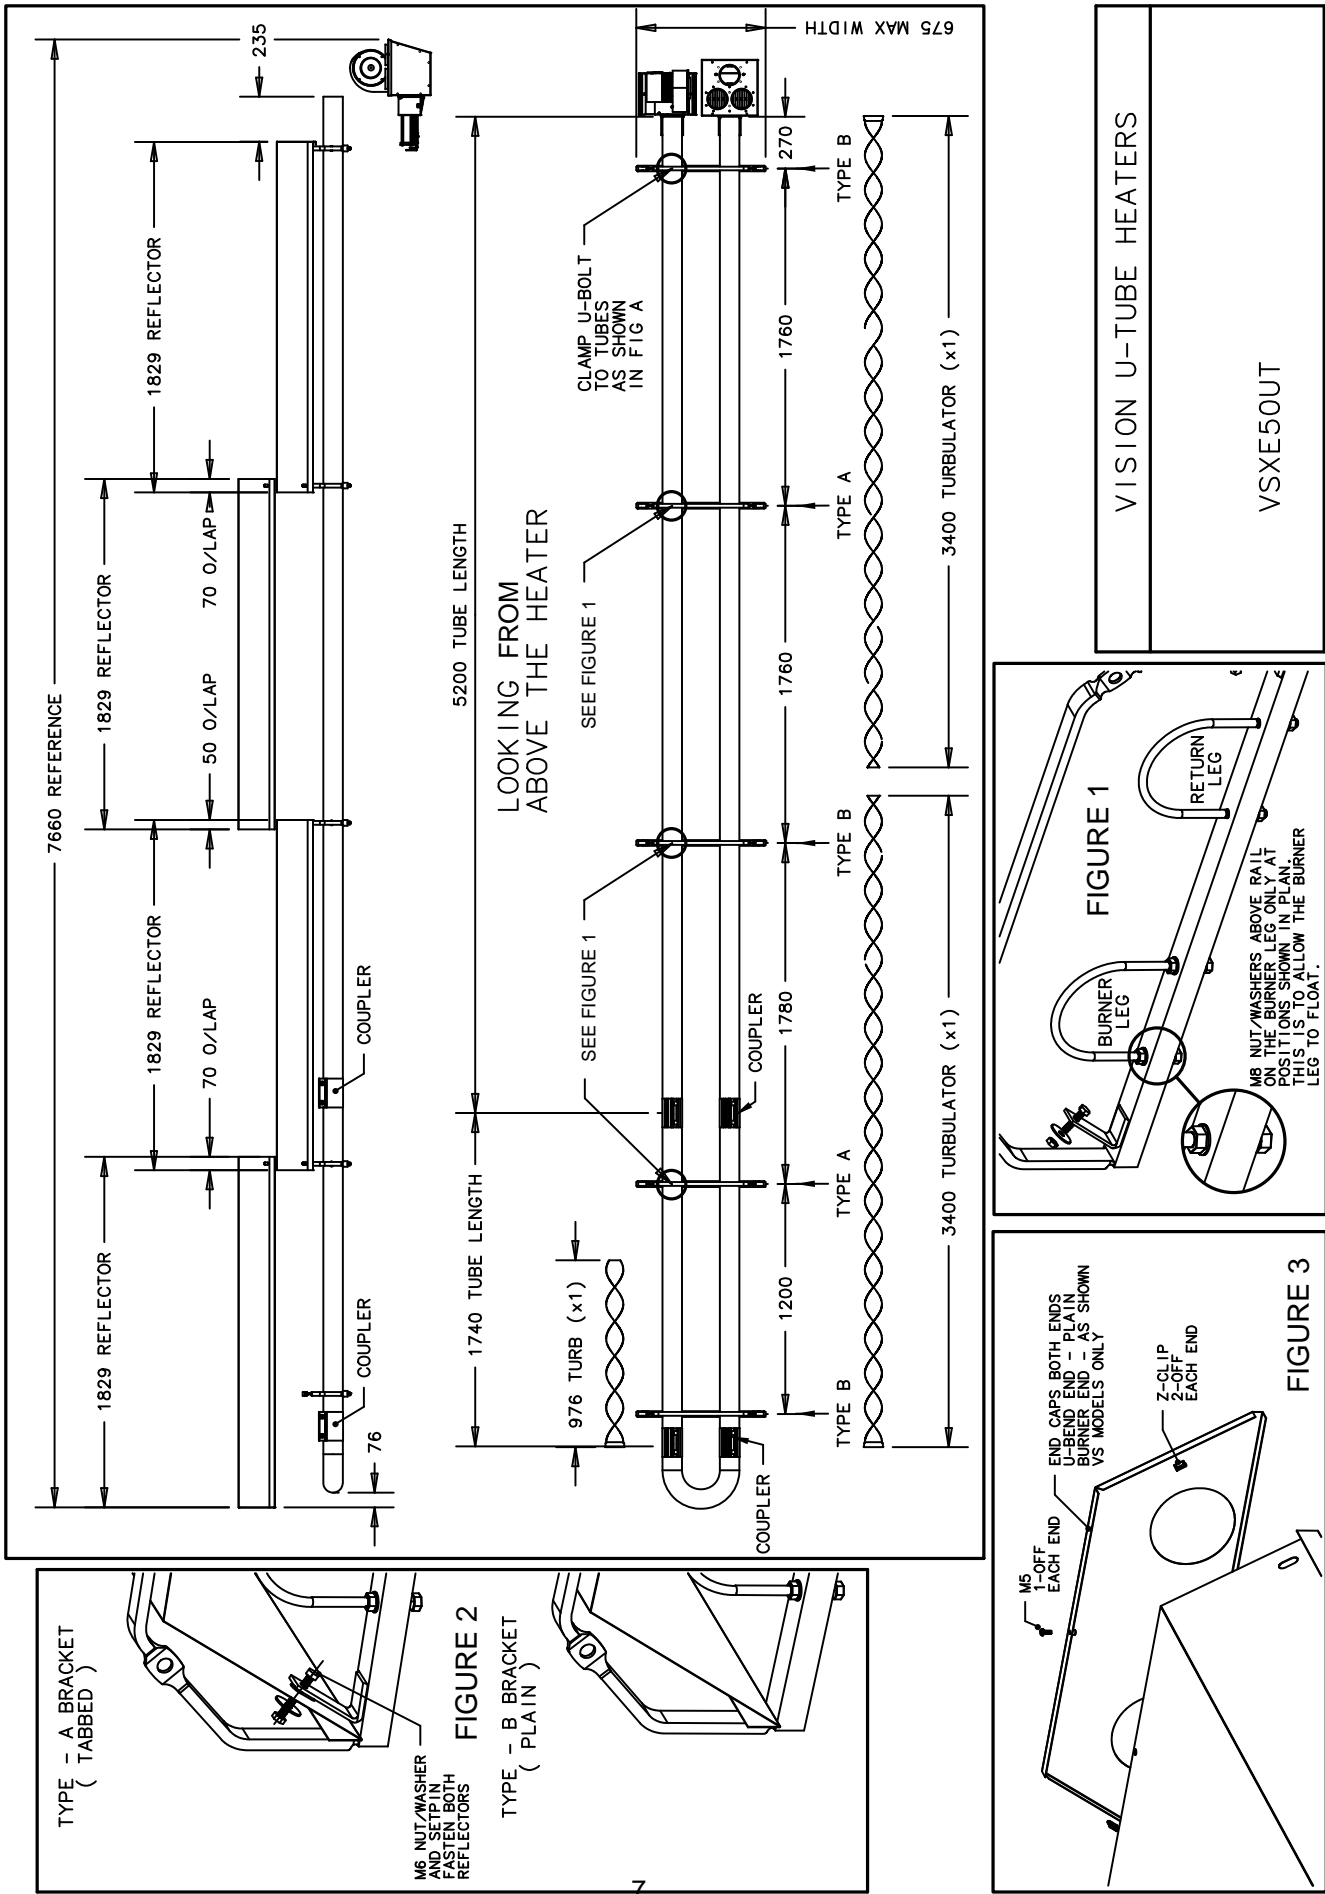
Vision Heater Assembly: Models VSXE U tube 50kW.
